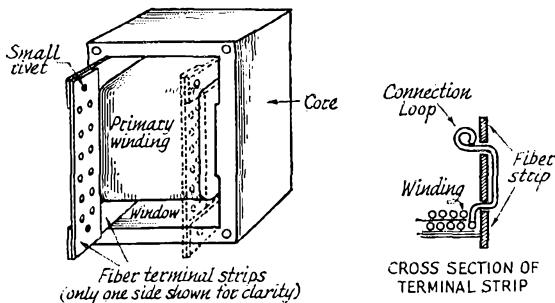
Details of fiberboard end terminals used for anchor points to hold ends of each secondary winding. Dimensions will depend on transformer used.
